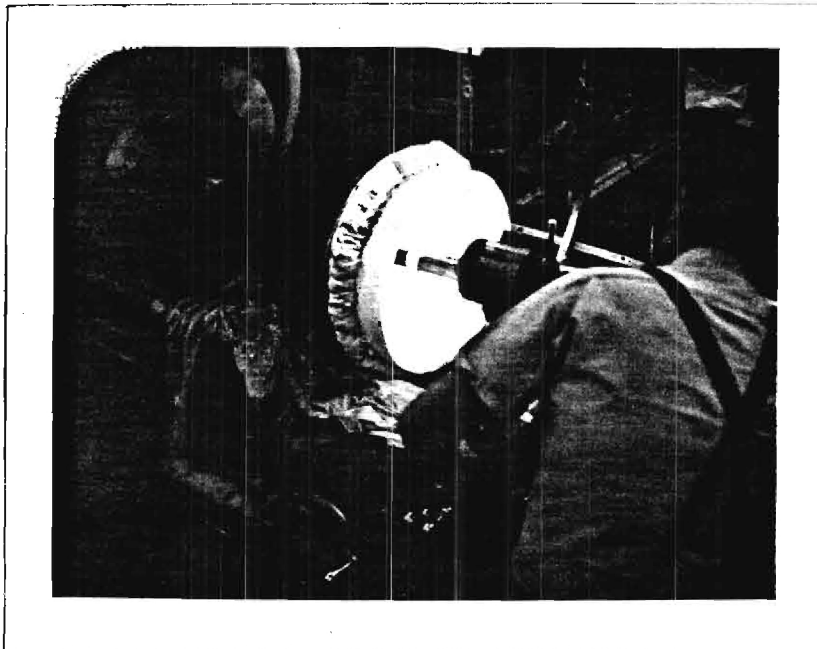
Lathe Setup for Internal Machining Showing Vacuum Chuck and Polyurethane Foam Bond Line at Radome-Chuck Interface
